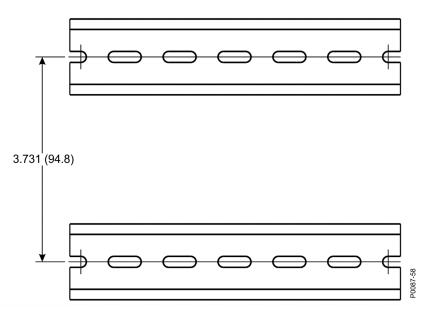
DIN Rail Mounting Dimensions for Style xRxxxxxx
